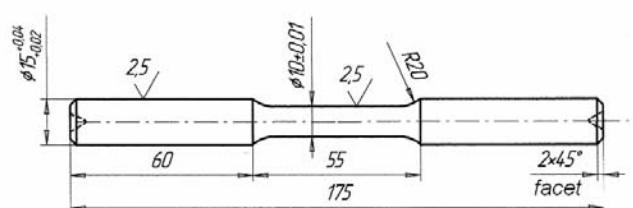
Design drawing of round specimens for corrosion fatigue tests.
